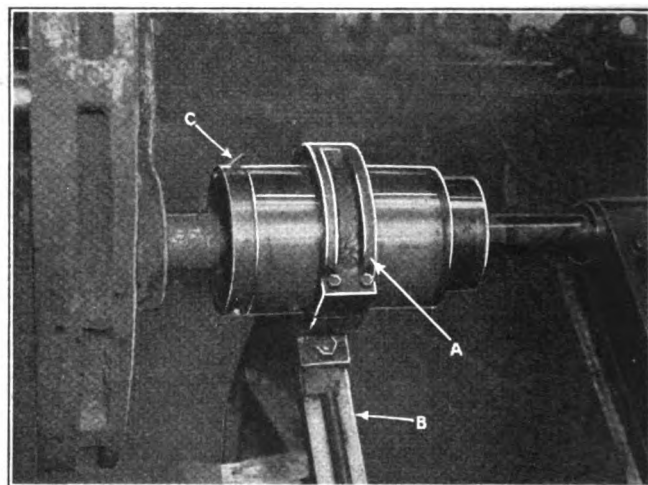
CRANK-PIN TURNING ATTACHMENT
